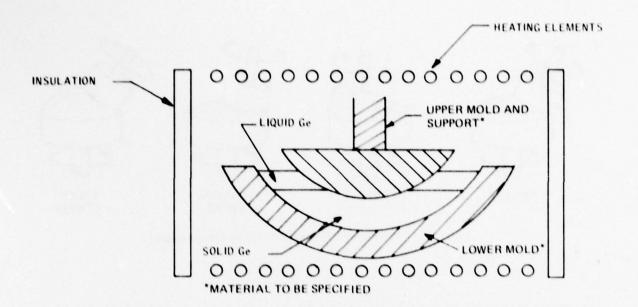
Furnace and Mold for Casting Concave-Convex Ge Lens Blanks
